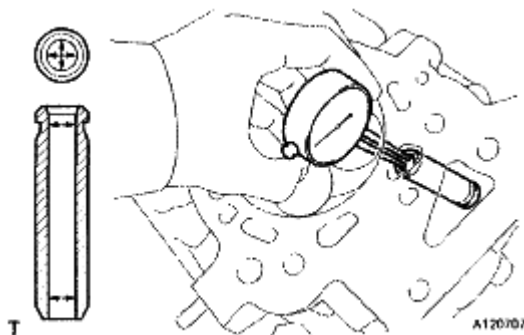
Measuring Inside Diameter Of Guide Bush Using Caliper Gauge
